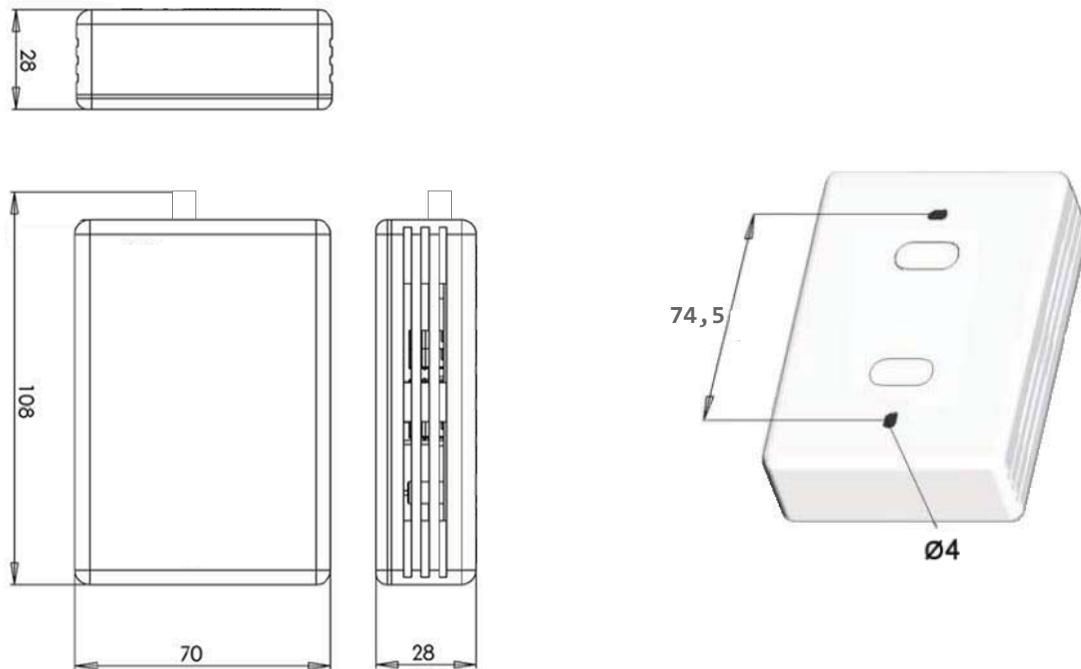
IntesisHome® device dimensions in mm and back view with fixing holes
